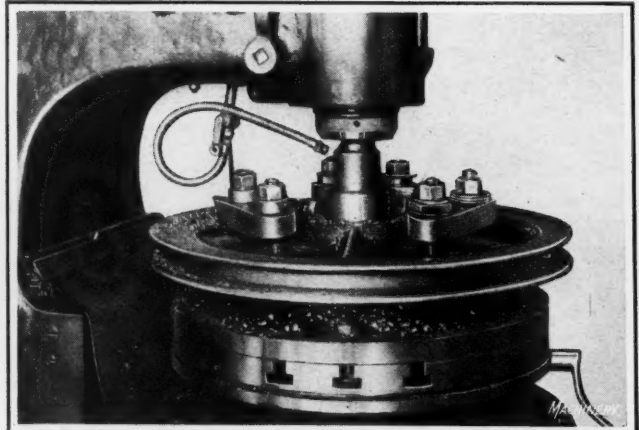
Boring the Hole in the Hub of a Crane Sheave
